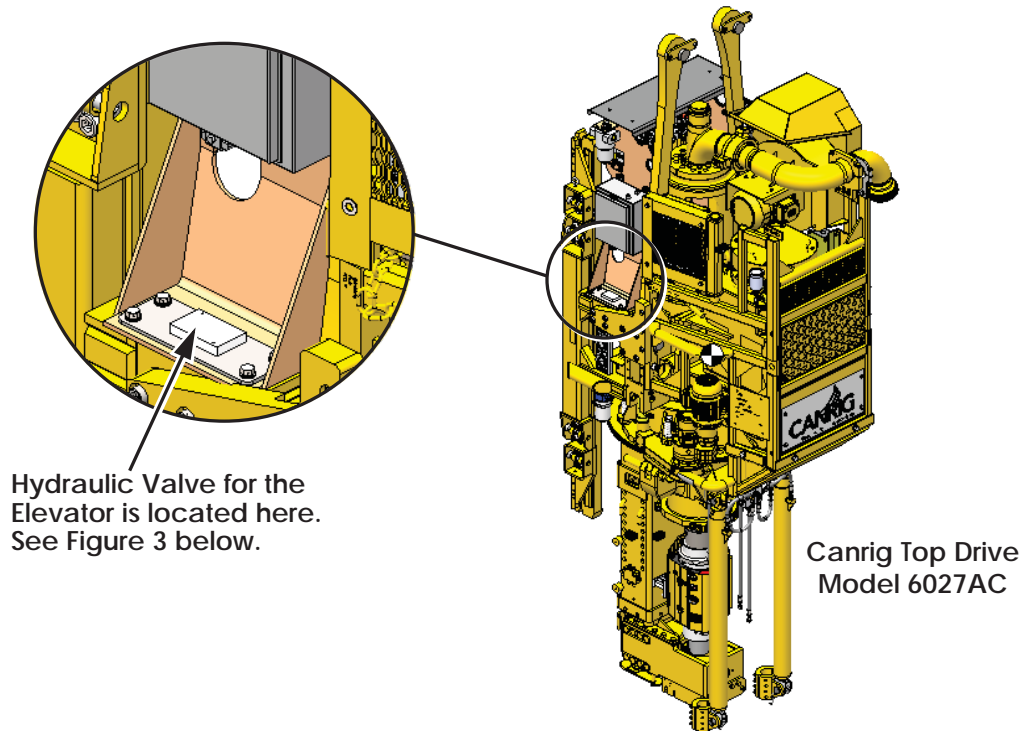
Hydraulic Elevator Valve Location on the 6027AC Top Drive
